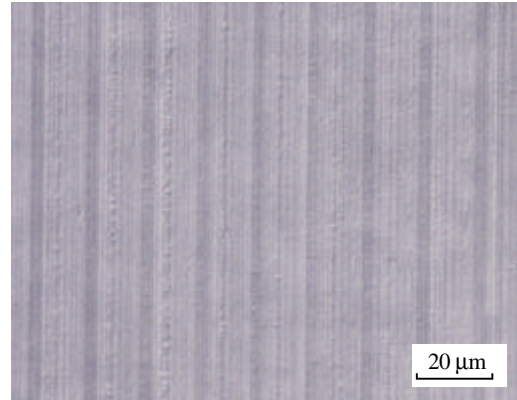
Nomarski photograph of CaF₂ surface machined under the feed rate of 15µm/rev in wet cutting, showing no thermal crack generation.
